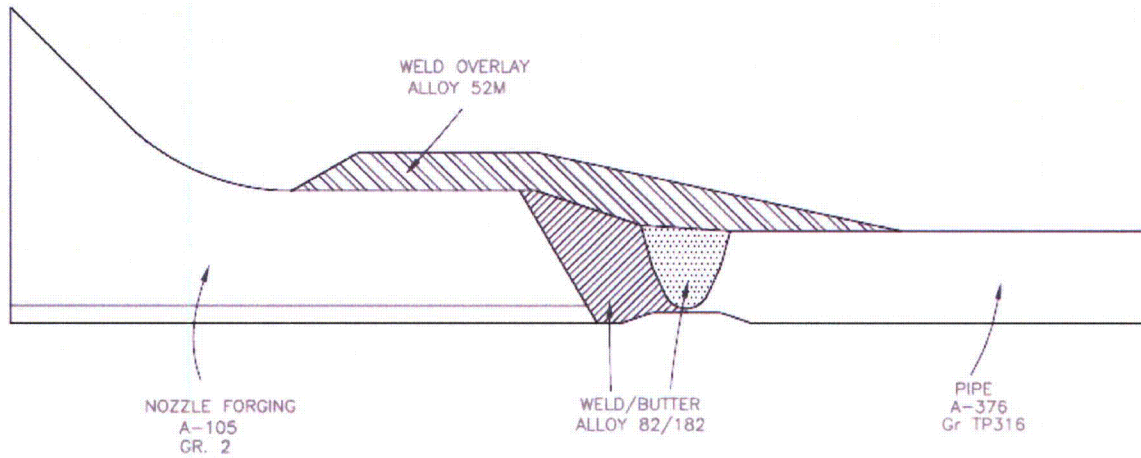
Illustration of Weld Overlay Design for Davis-Besse Hot Leg Surge Nozzle
